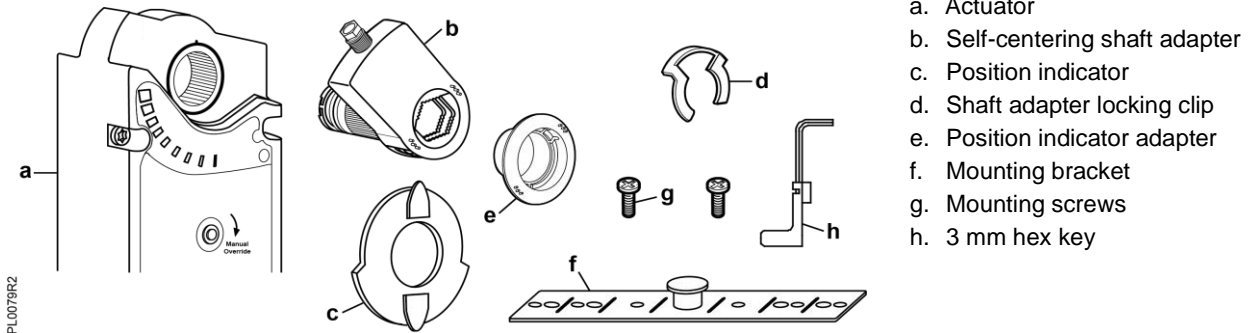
Parts of the DKN-MS41-7183 Actuator.
